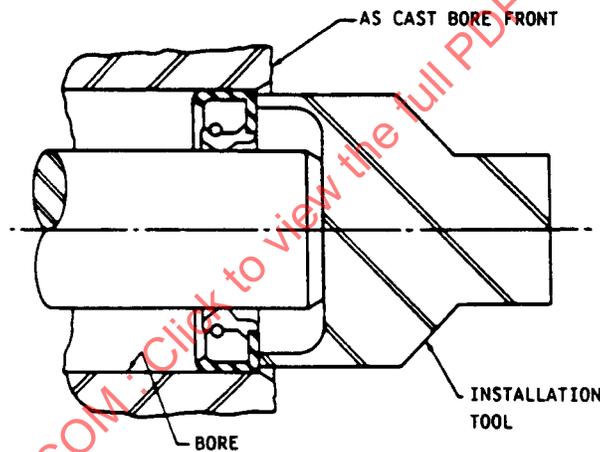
THROUGH BORE: INSTALLATION TOOL BOTTOMS ON SHAFT— CONFORMS WITH ISO 6194/3
